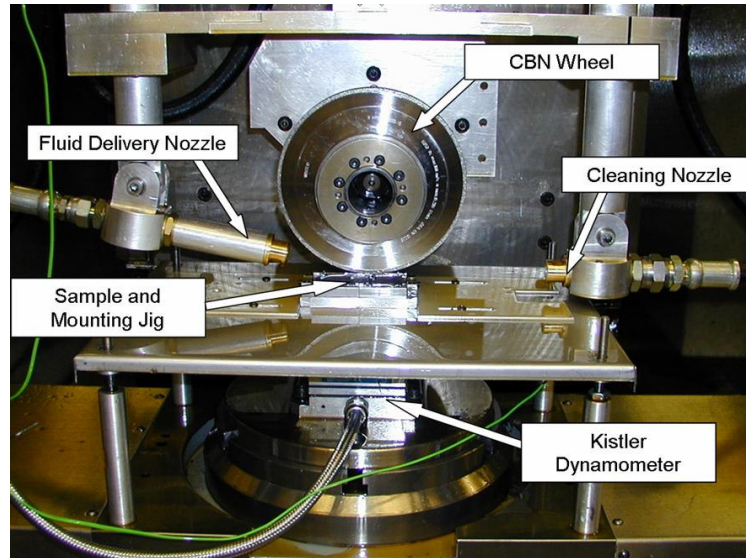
Grinding set up in the Edgetek SAM grinding centre
